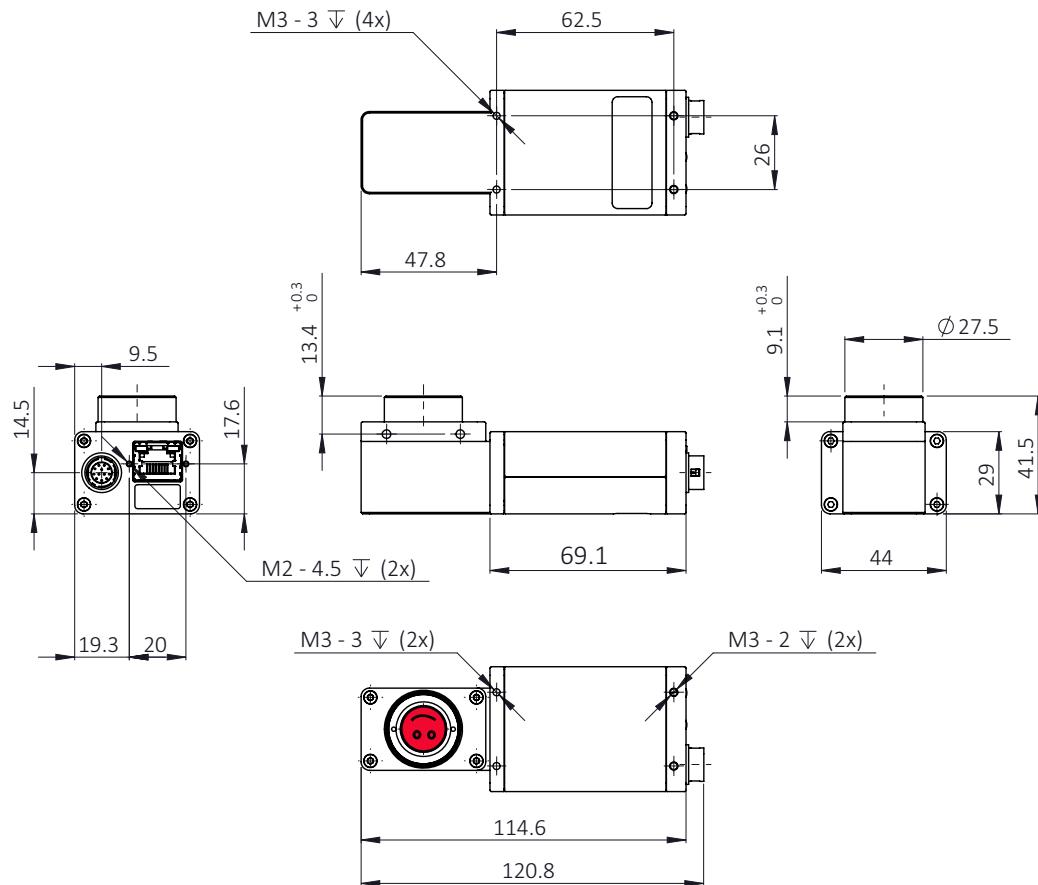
Manta type B W90 S90 housing with C-Mount dimensions
